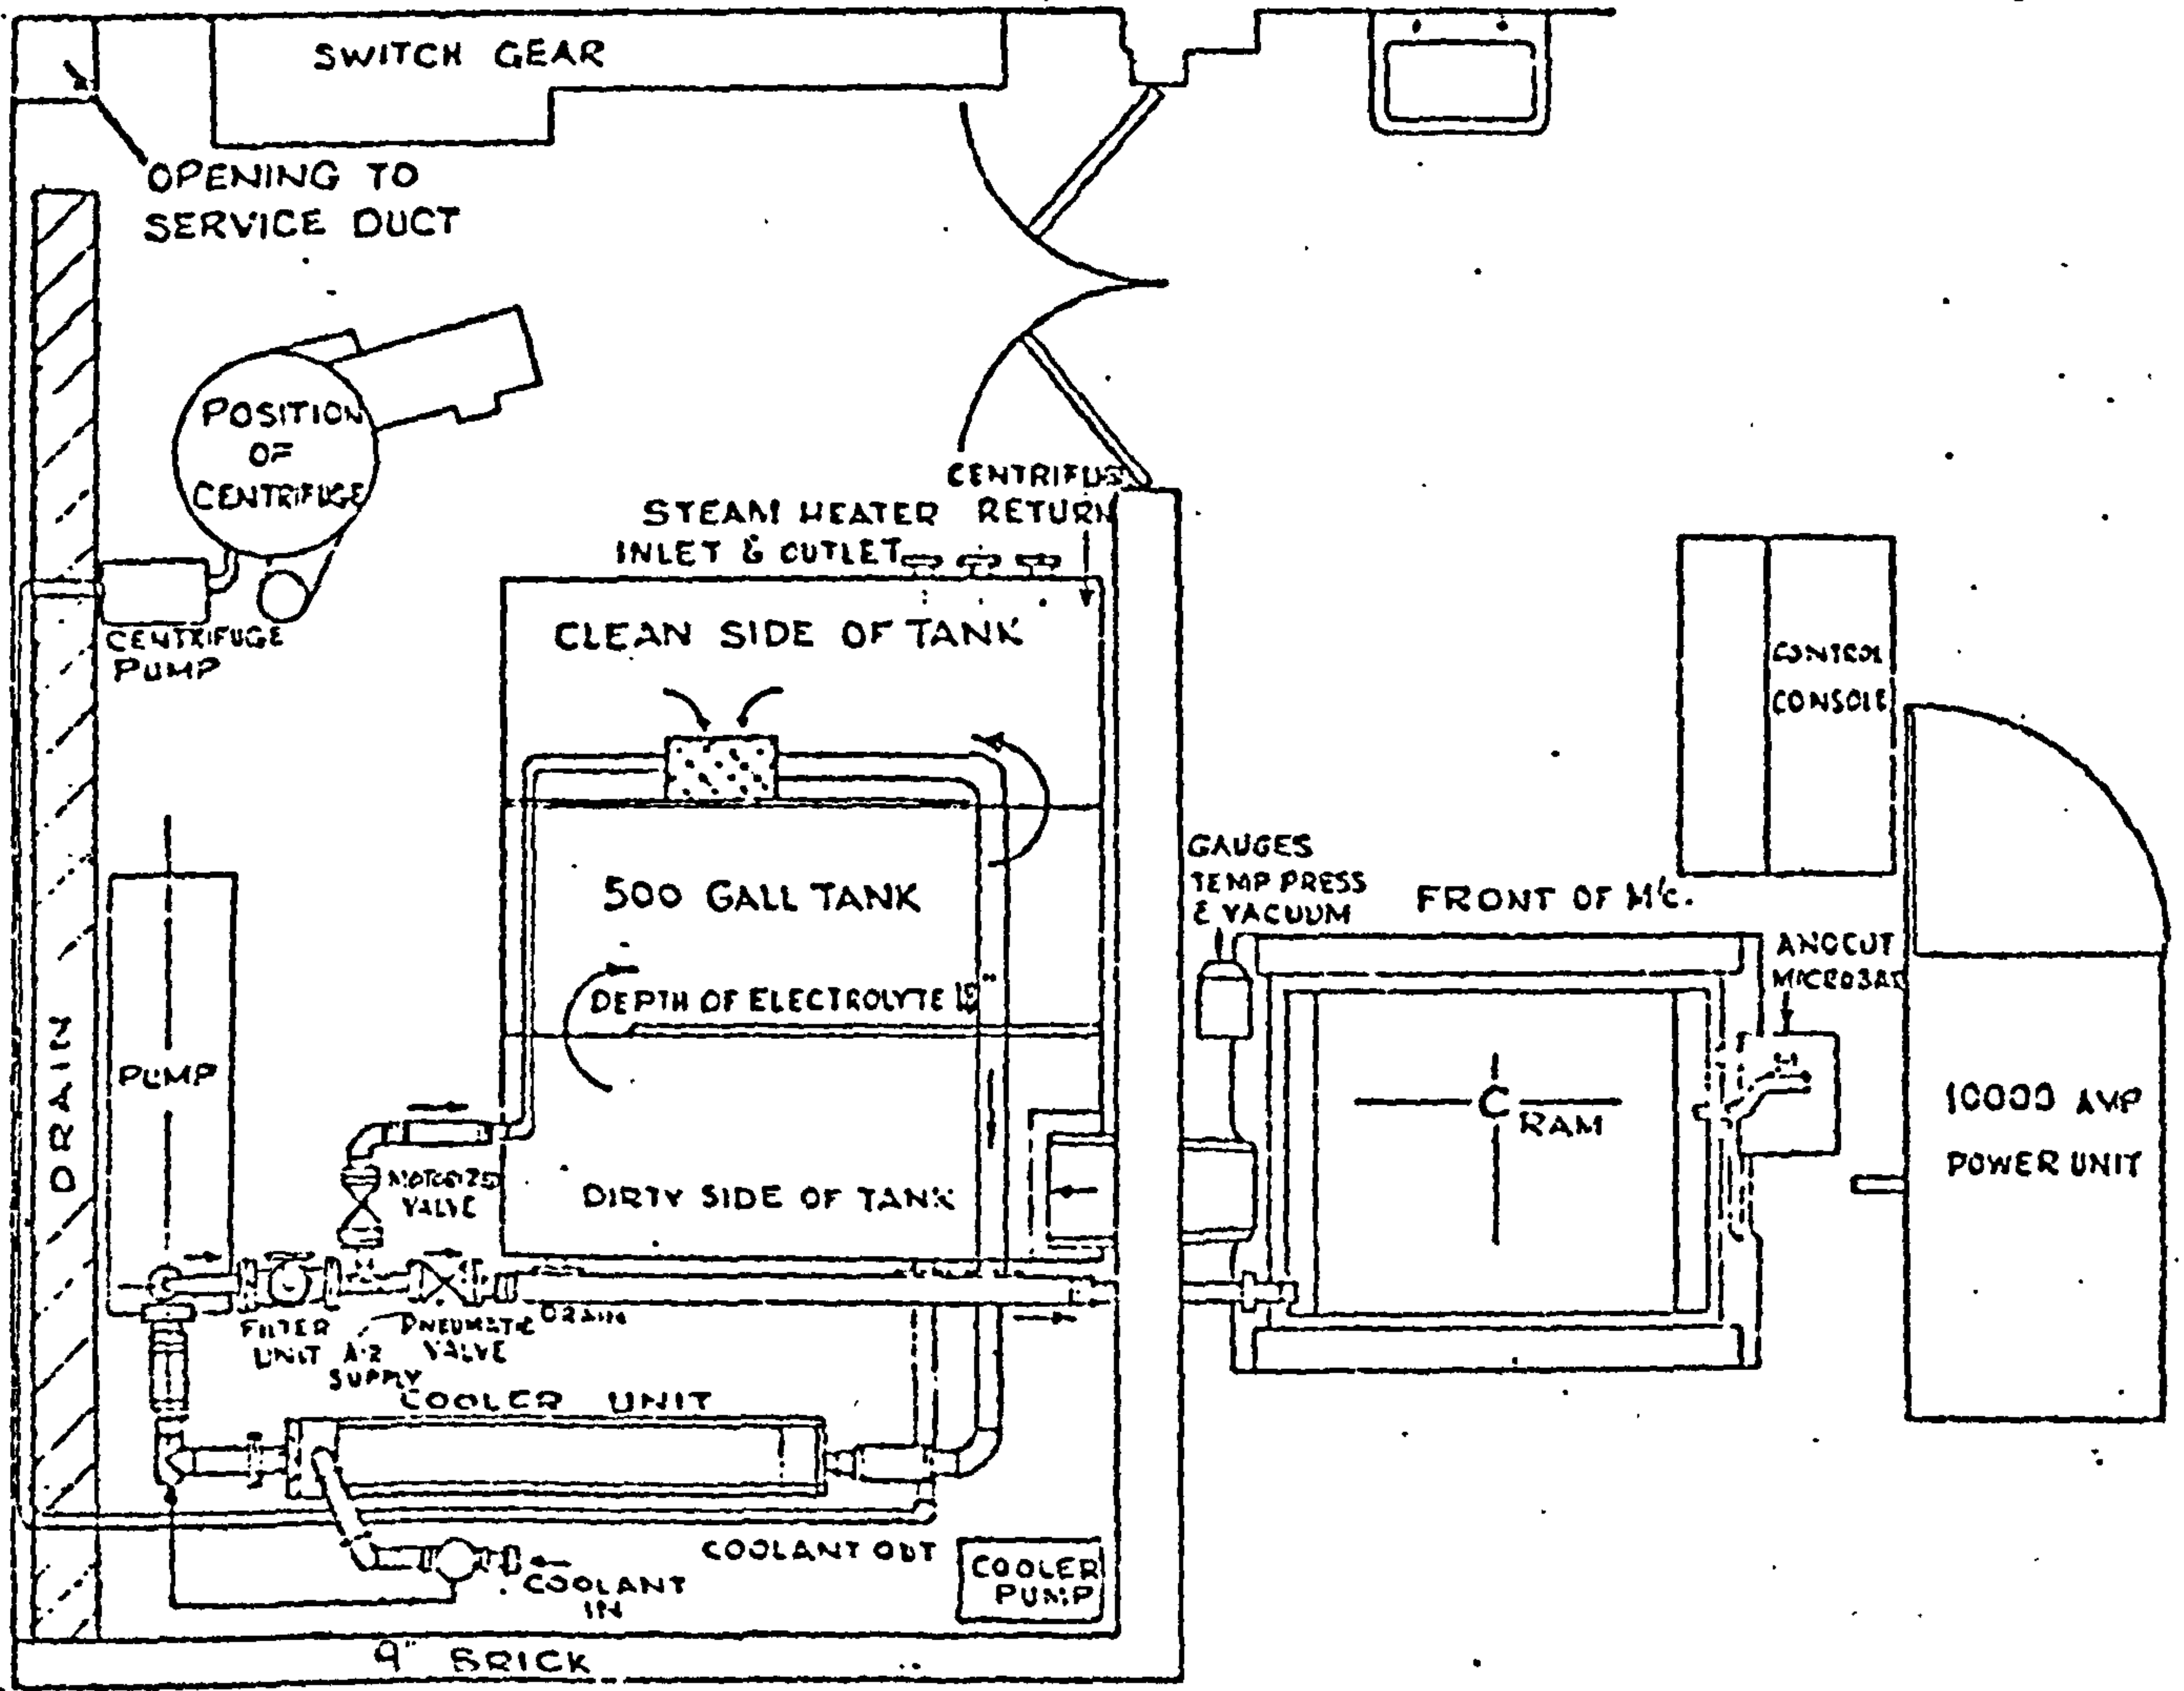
PLAN OF THE ANOCUT INSTALLATION
